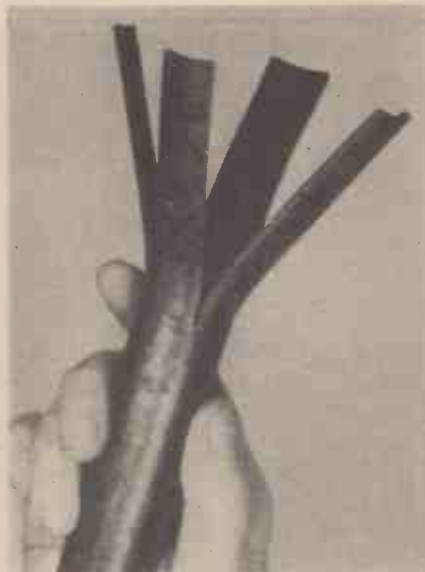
Showing the splayed-out ends of the bottom tube.
